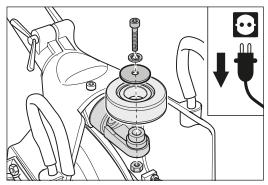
Remove the screw with the washers and nut in the center of the wheel and take off the back wheel.
